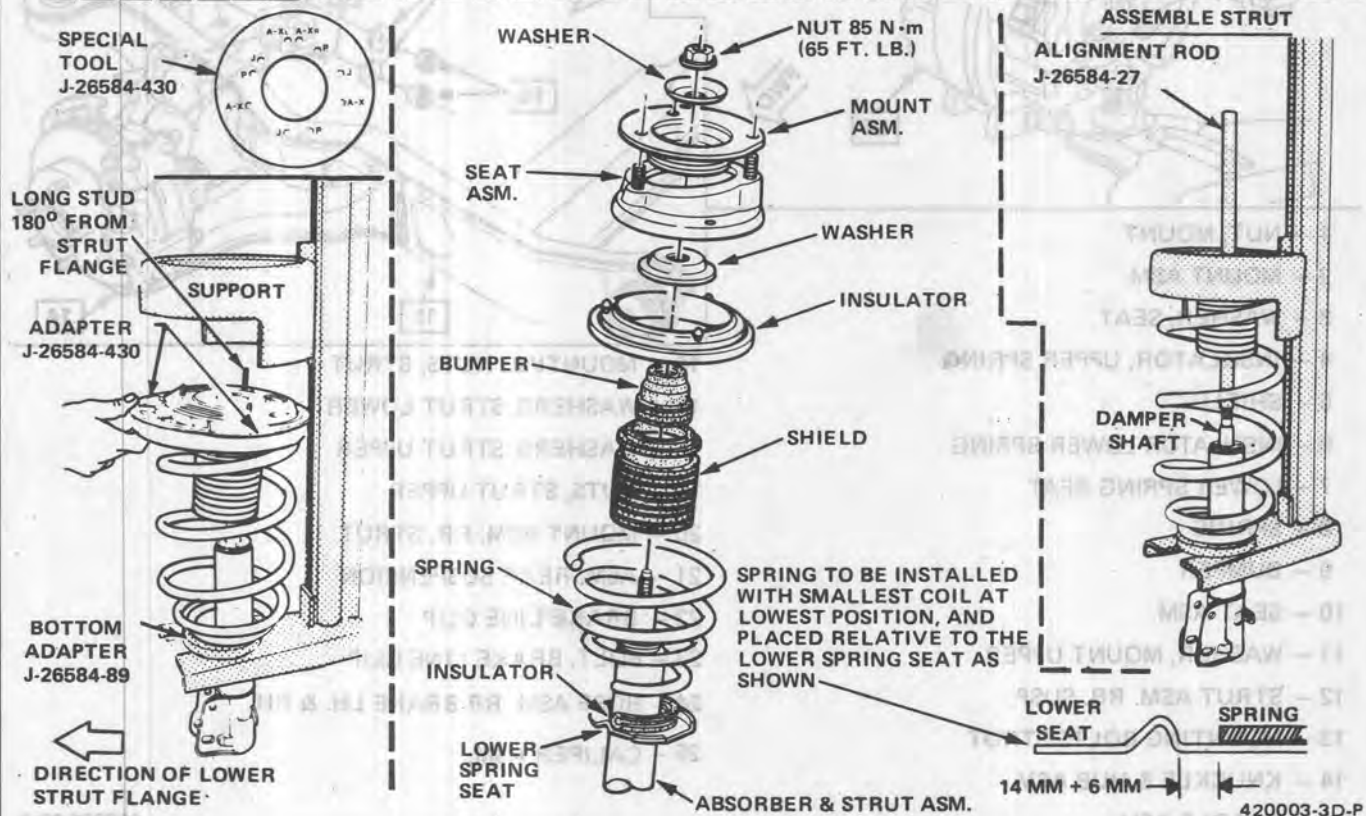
D-6 Disassemble/Reassemble Strut Assembly
